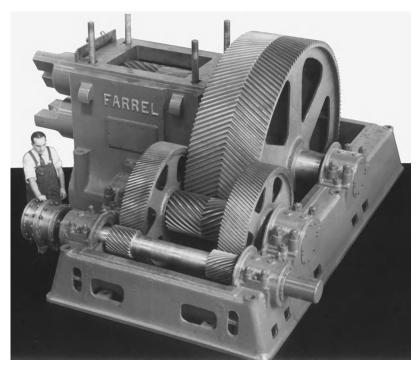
Helical gear speed reducer. (Farrel-Birmingham Co.)
